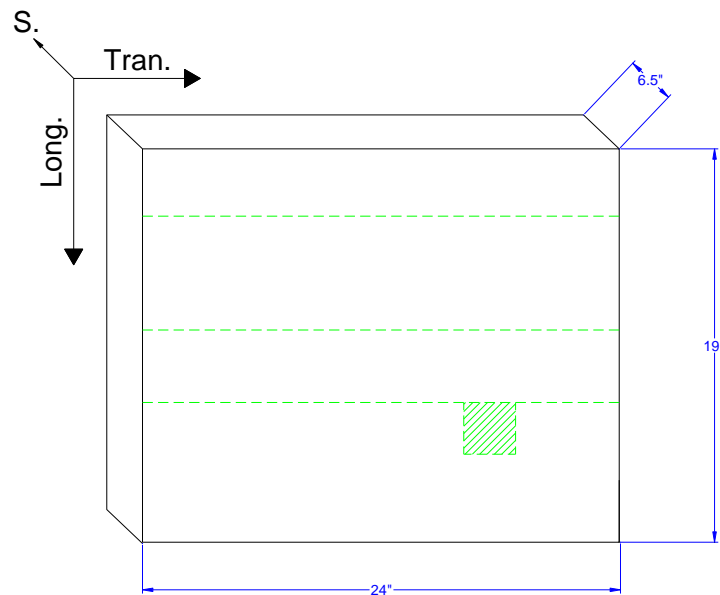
Ti-6Al-4V billet (#75838) indicating dimensions, orientations, and sectioning plan prior to specimen extraction.
